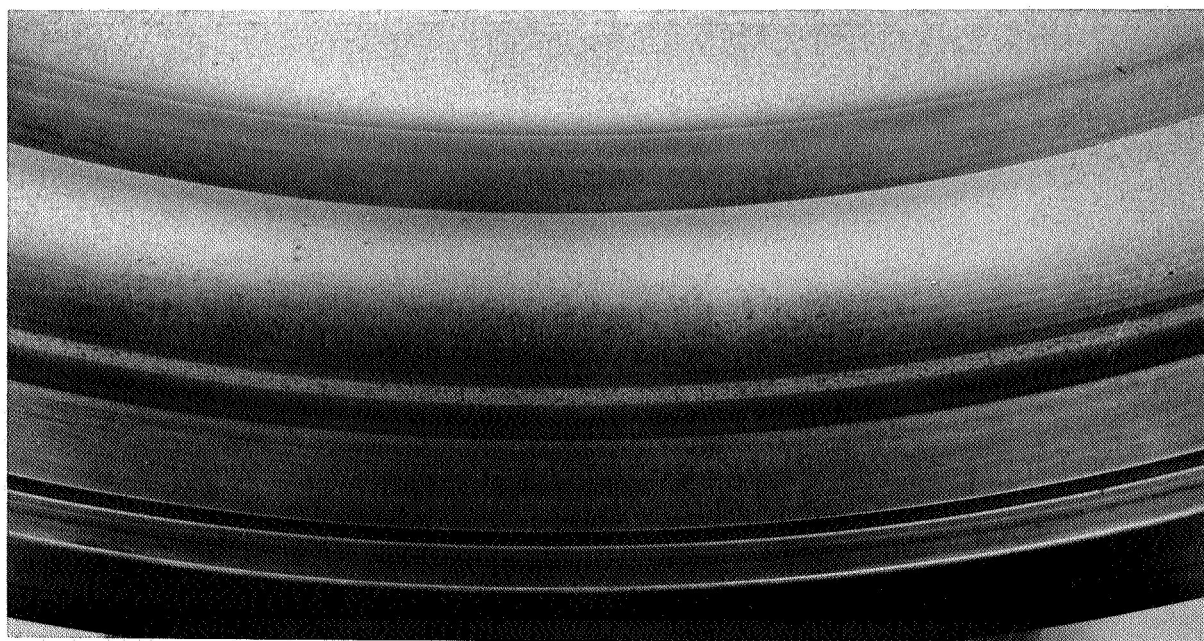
BALL PATH ON OUTER RING - BEARING S/N 24
